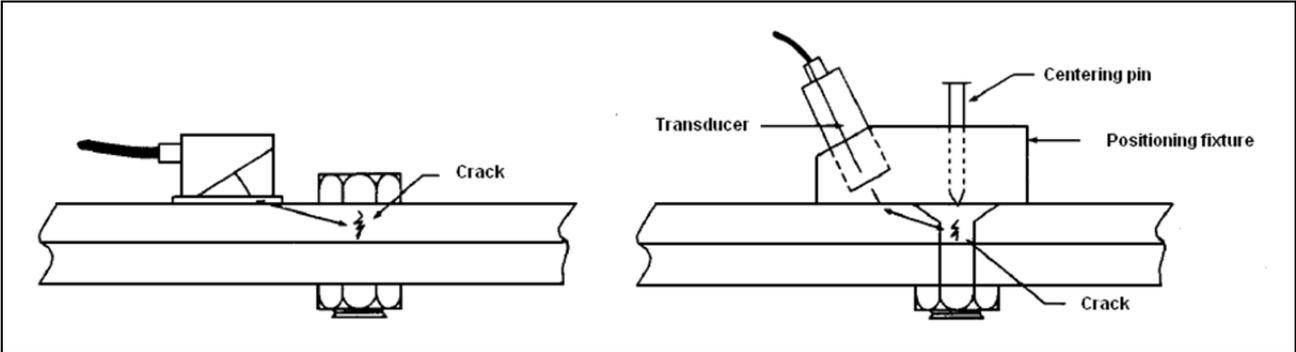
Application of transducer fixture in UT; in hand positioning of transducer the minimum detectable crack size is 4-8 mm while using a fixture brings this size down to 2-4 mm
